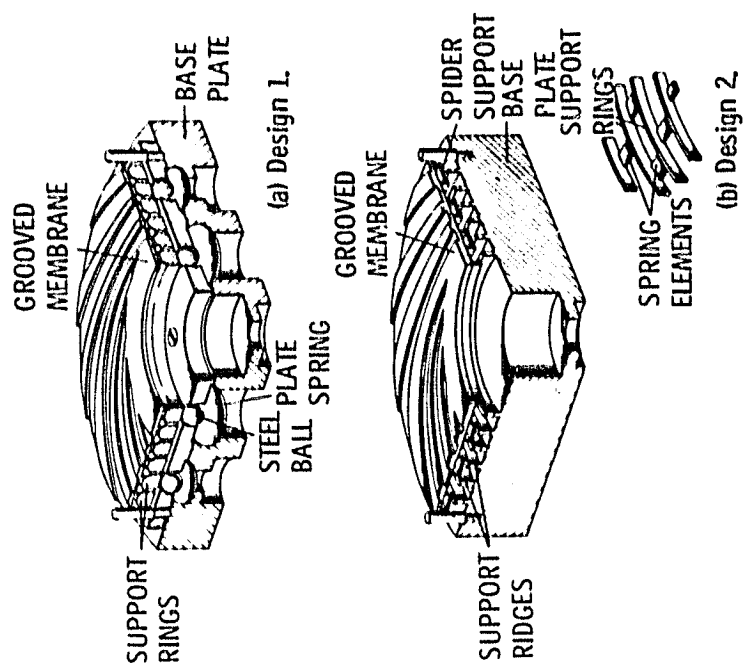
Isometric drawings of thrust bearings. (From ref. 59.)
